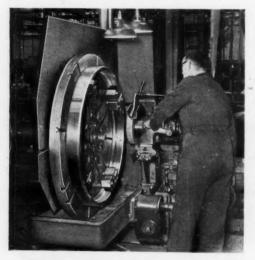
Grinding a 41-in. Diameter Angular Contact Outer Race, on a Churchill 48-in. Machine
